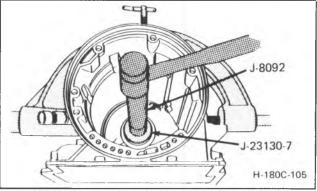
Installing Reaction Sun Gear Drum Bushing Sleeve
